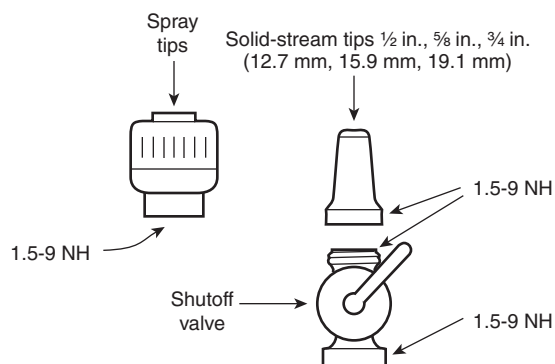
Nozzle Assembly for 1½ in. (38 mm) Hose.
